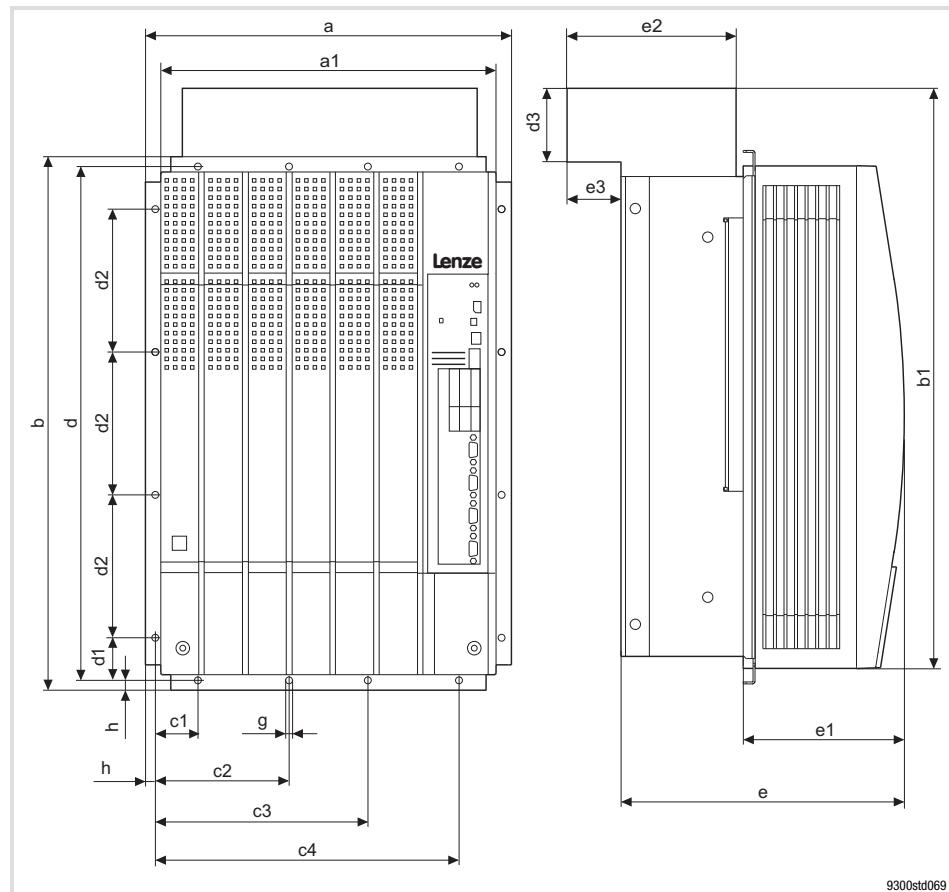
Dimensions for thermally separated mounting 45 kW
